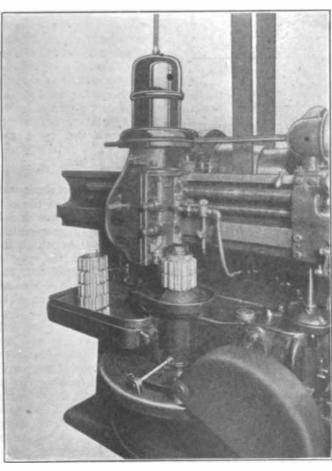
Gear shaper cutting two 7/6-pitch stub tooth pinions for trac:or work
